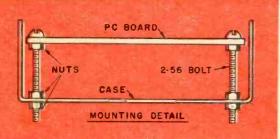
Cutaway view of printed circuit board mounting. Four bolts are used as grounds.
